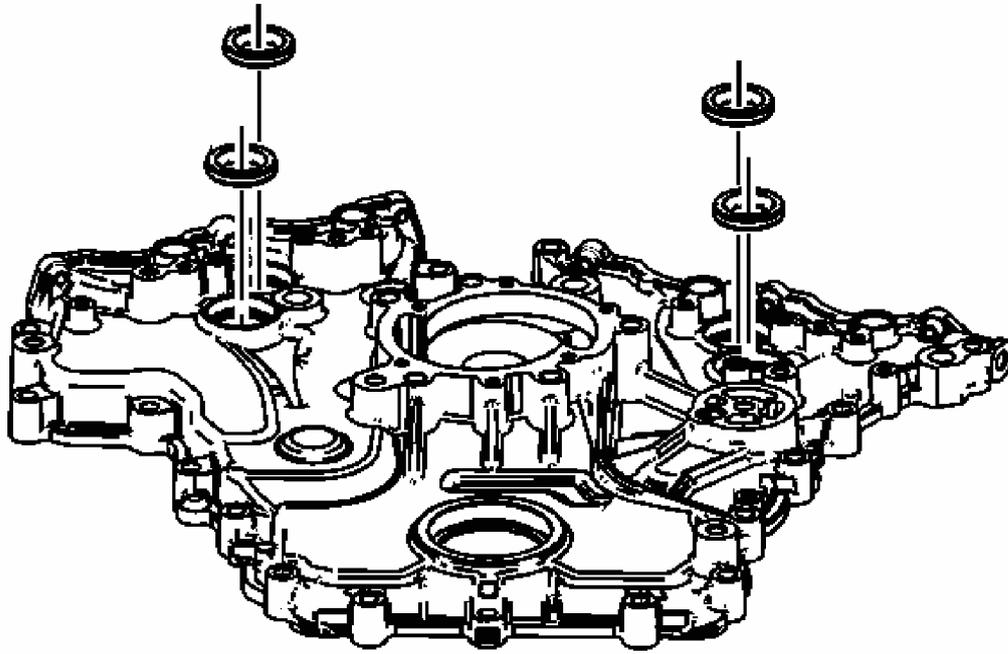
View Of Camshaft Position Actuator Valve Oil Seals
